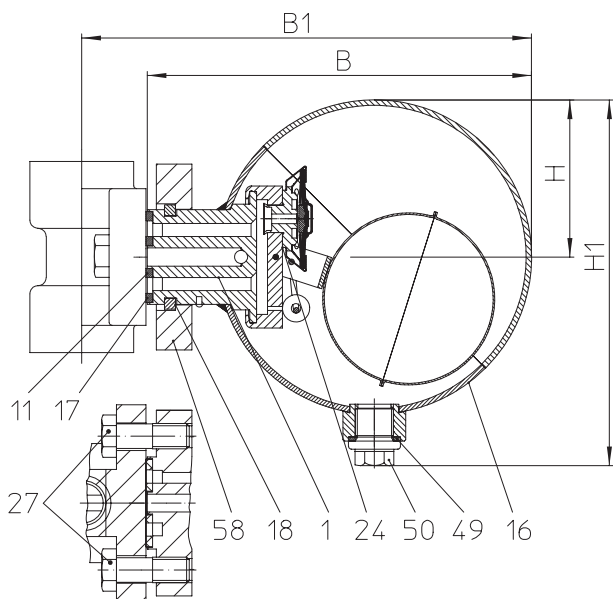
Universal-Flange with 2 x 3/8" UNC-Thread
